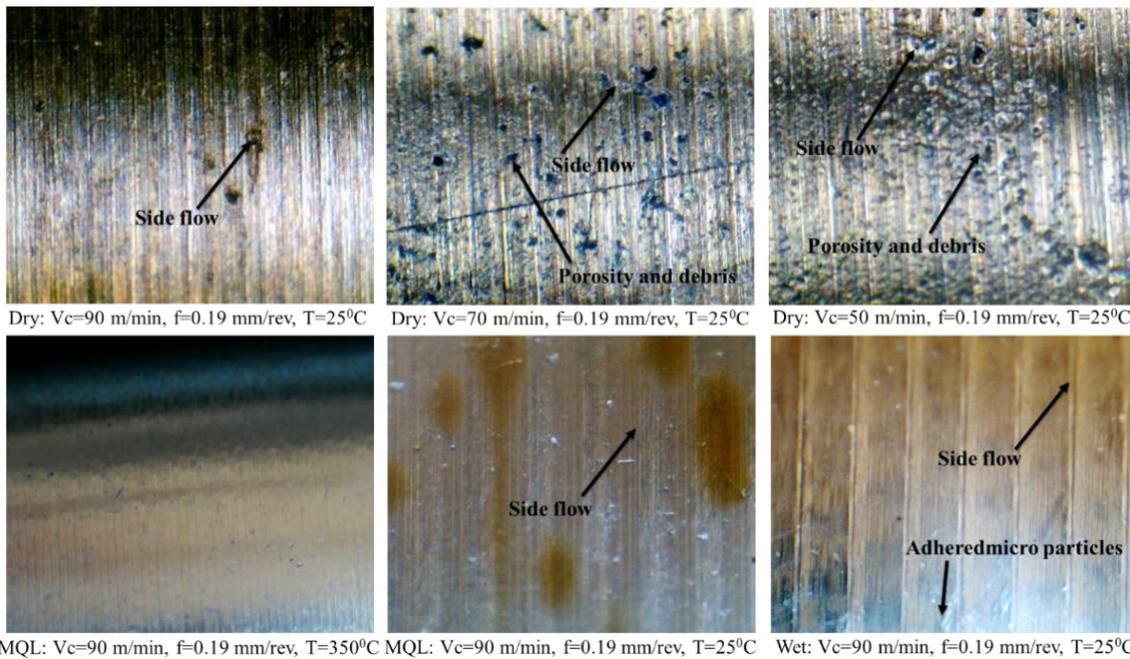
surface morphology of machined specimens under different machining parameters and conditions
